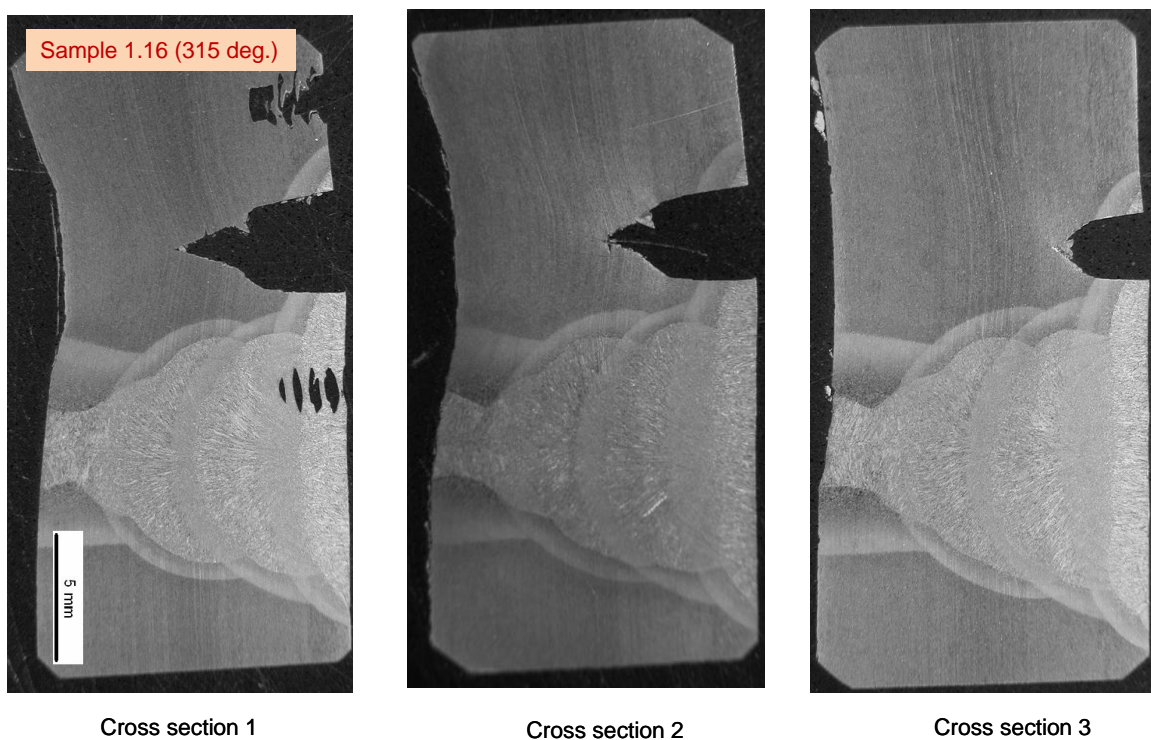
Multi-cross-sectional view of a flaw in HAZ
